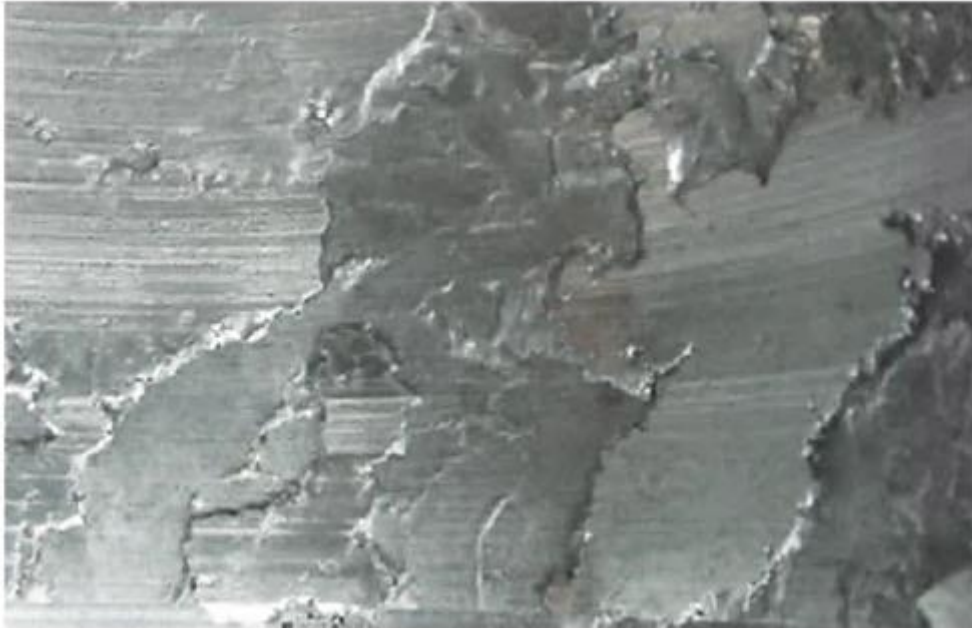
Fatigue cracks - caused by long-term “overheating” of the bearing or dynamic stress [24].
